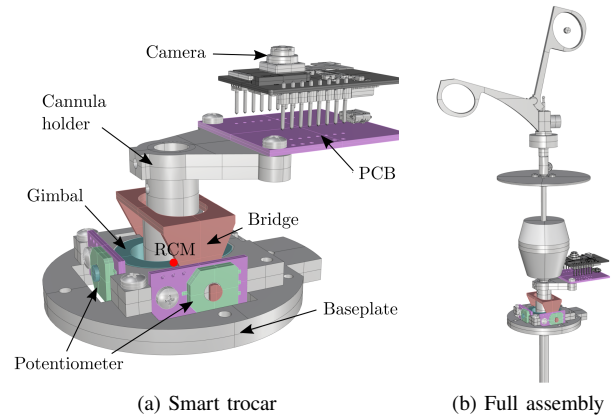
CAD of the smart trocar final prototype. a) a close view of the base plate, b) a complete view with the tool and trocar mounted on it.
